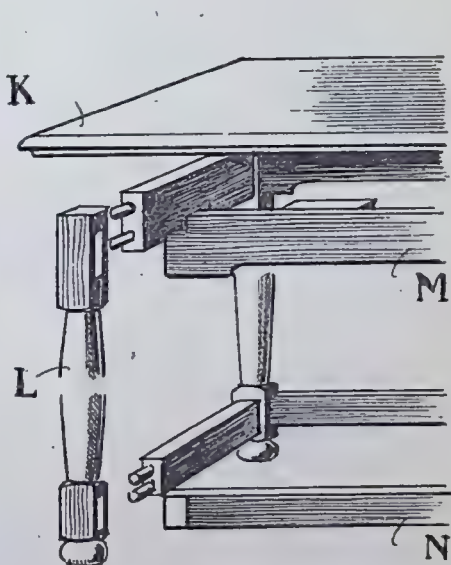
TABLE PARTS, SHOWING CONSTRUCTION.
